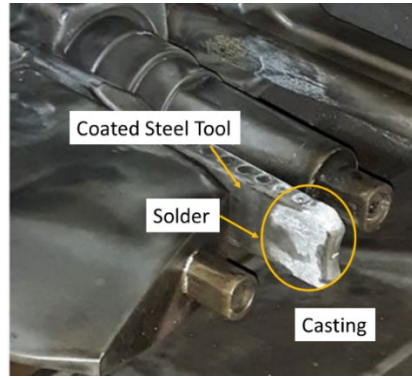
Die cast tooling with solder at end of core pin. (Photo courtesy of Mercury Marine.)
